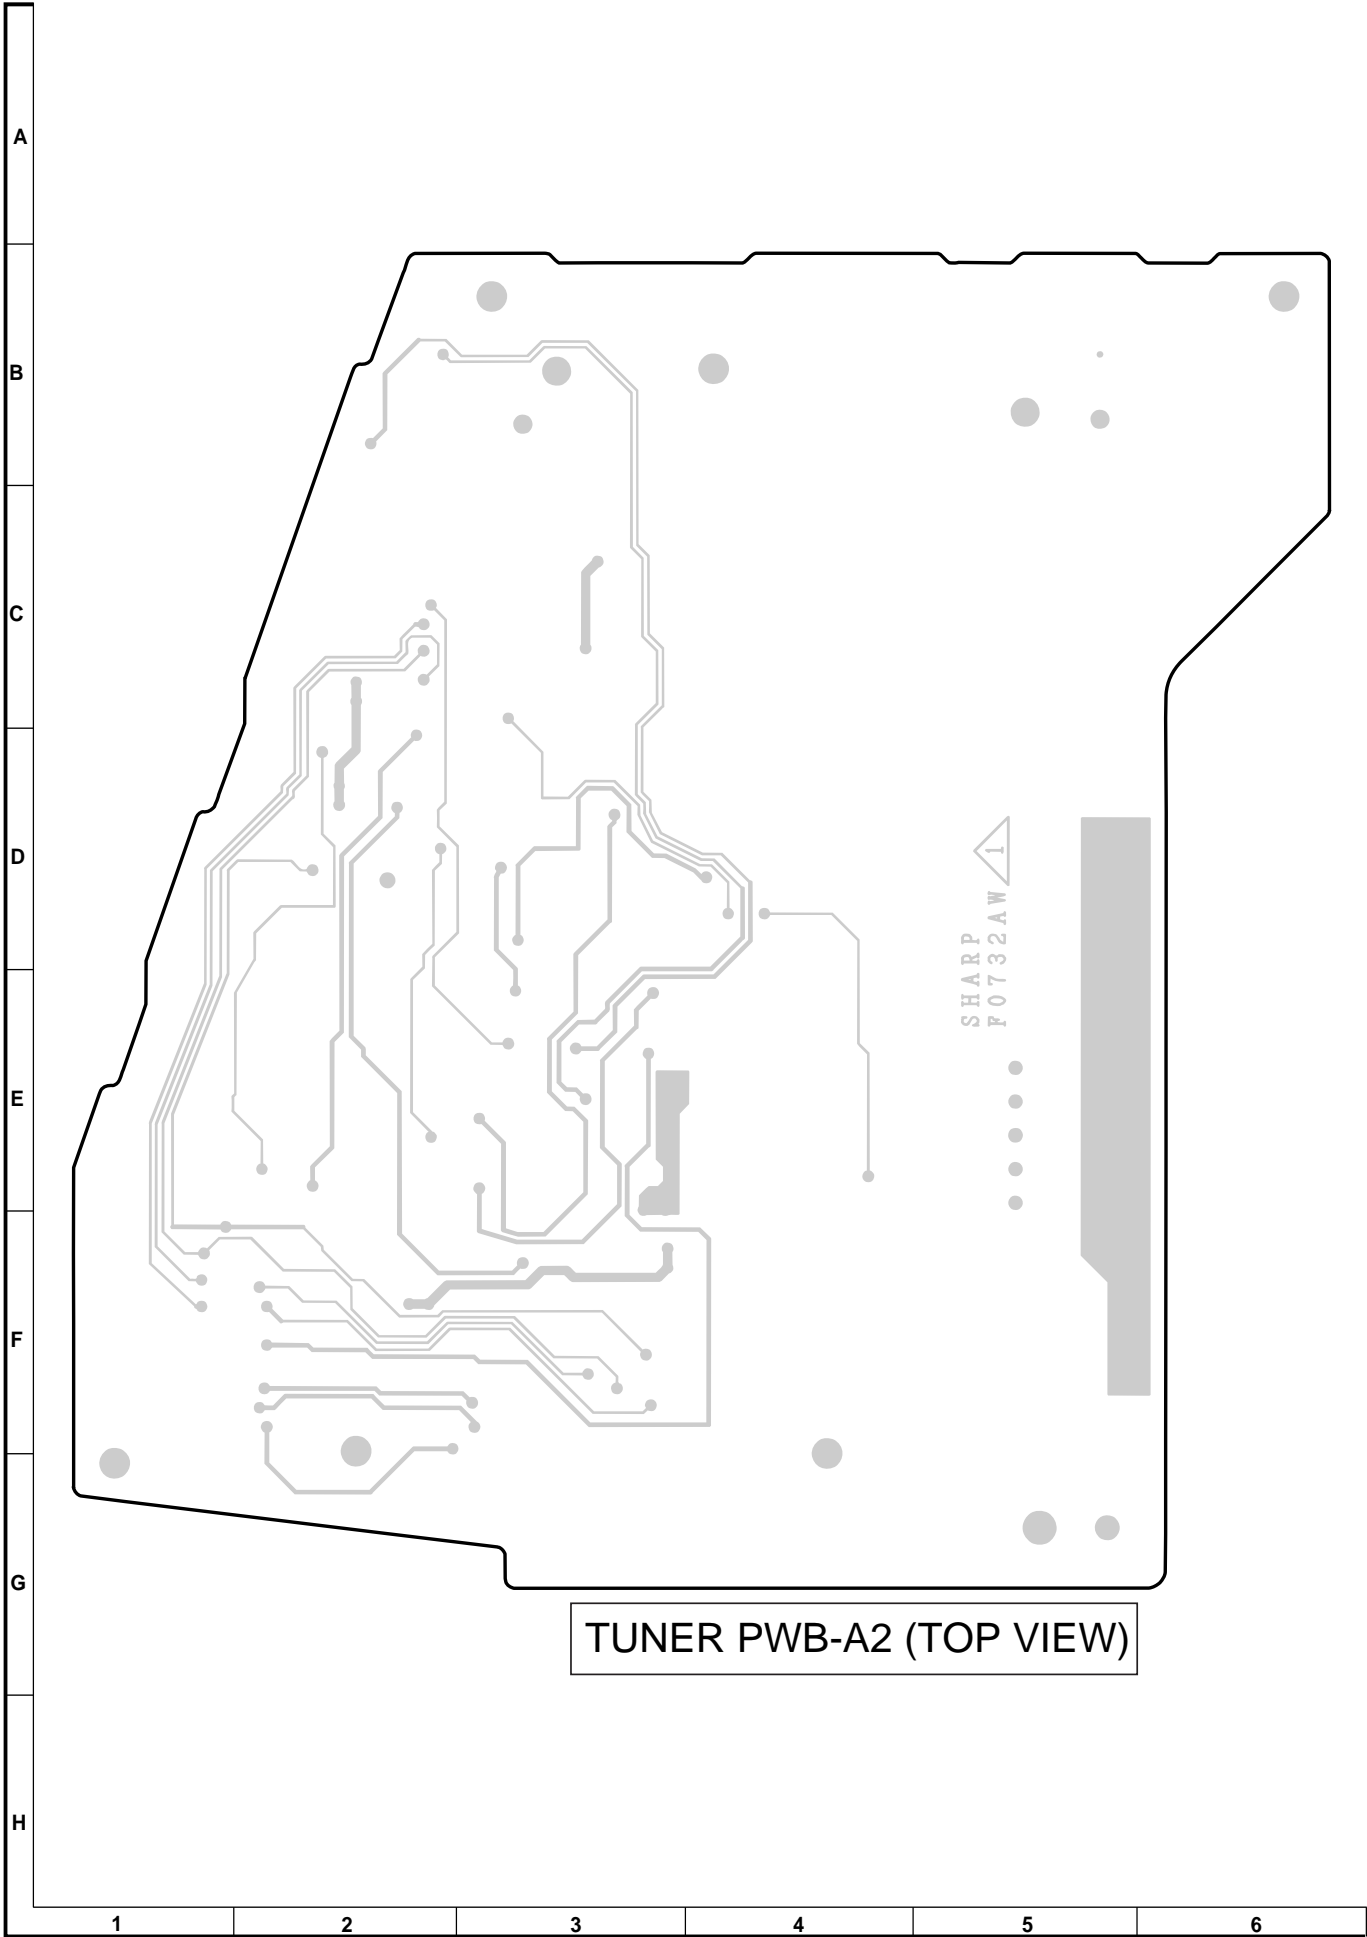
WIRING SIDE OF P.W.BOARD (3/13)
